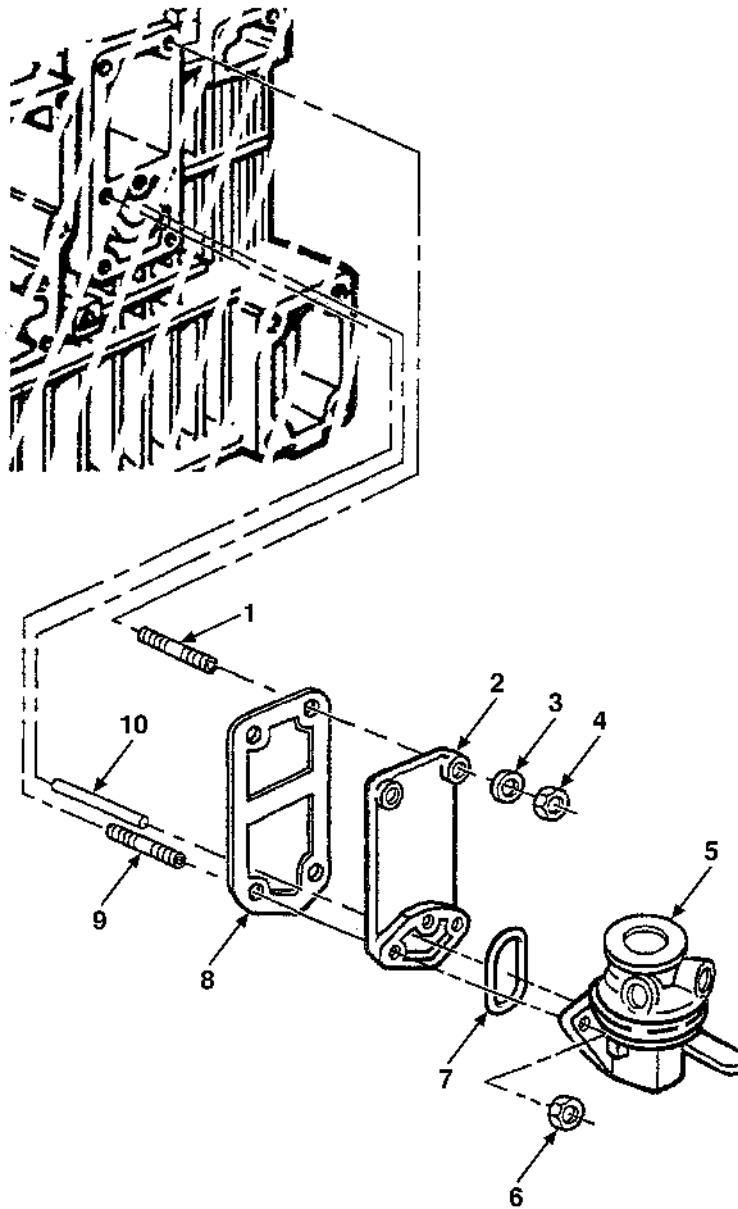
ENGINE FUEL PUMP ASSEMBLY
